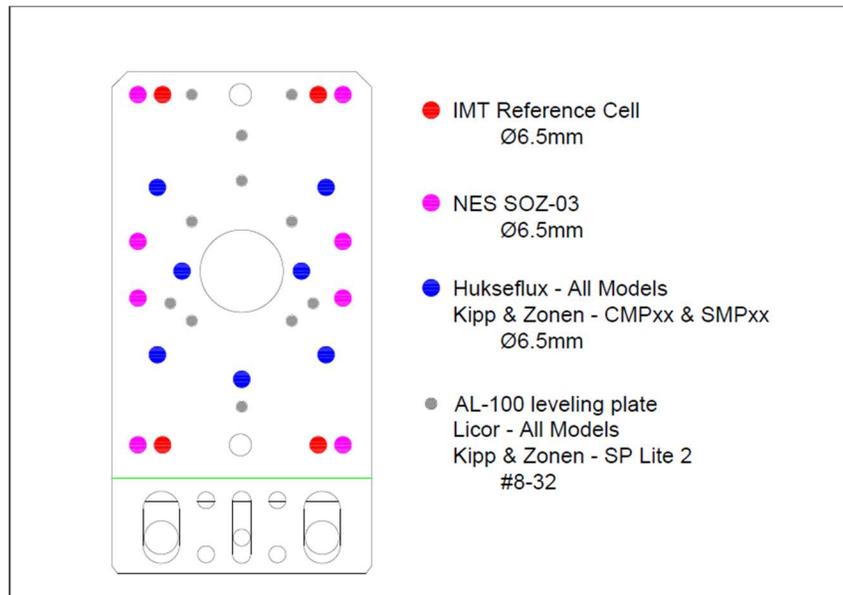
Mounting Holes for Select Pyranometers and Sensors
